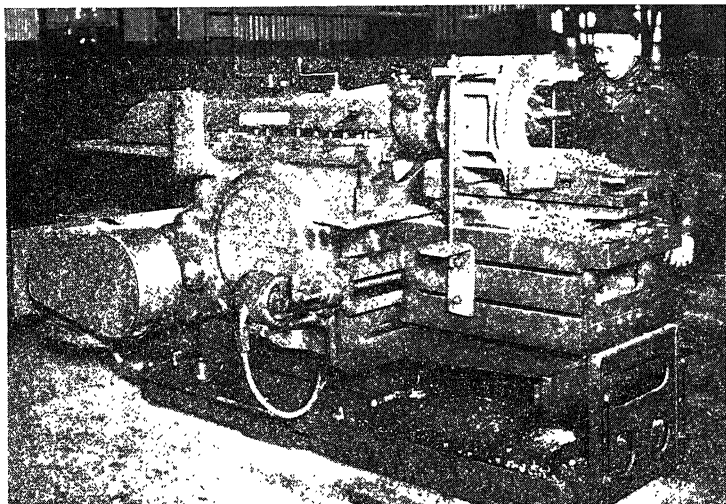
A special job in a 24-in. shaper. (Courtesy of The American Tool Works Company.)
